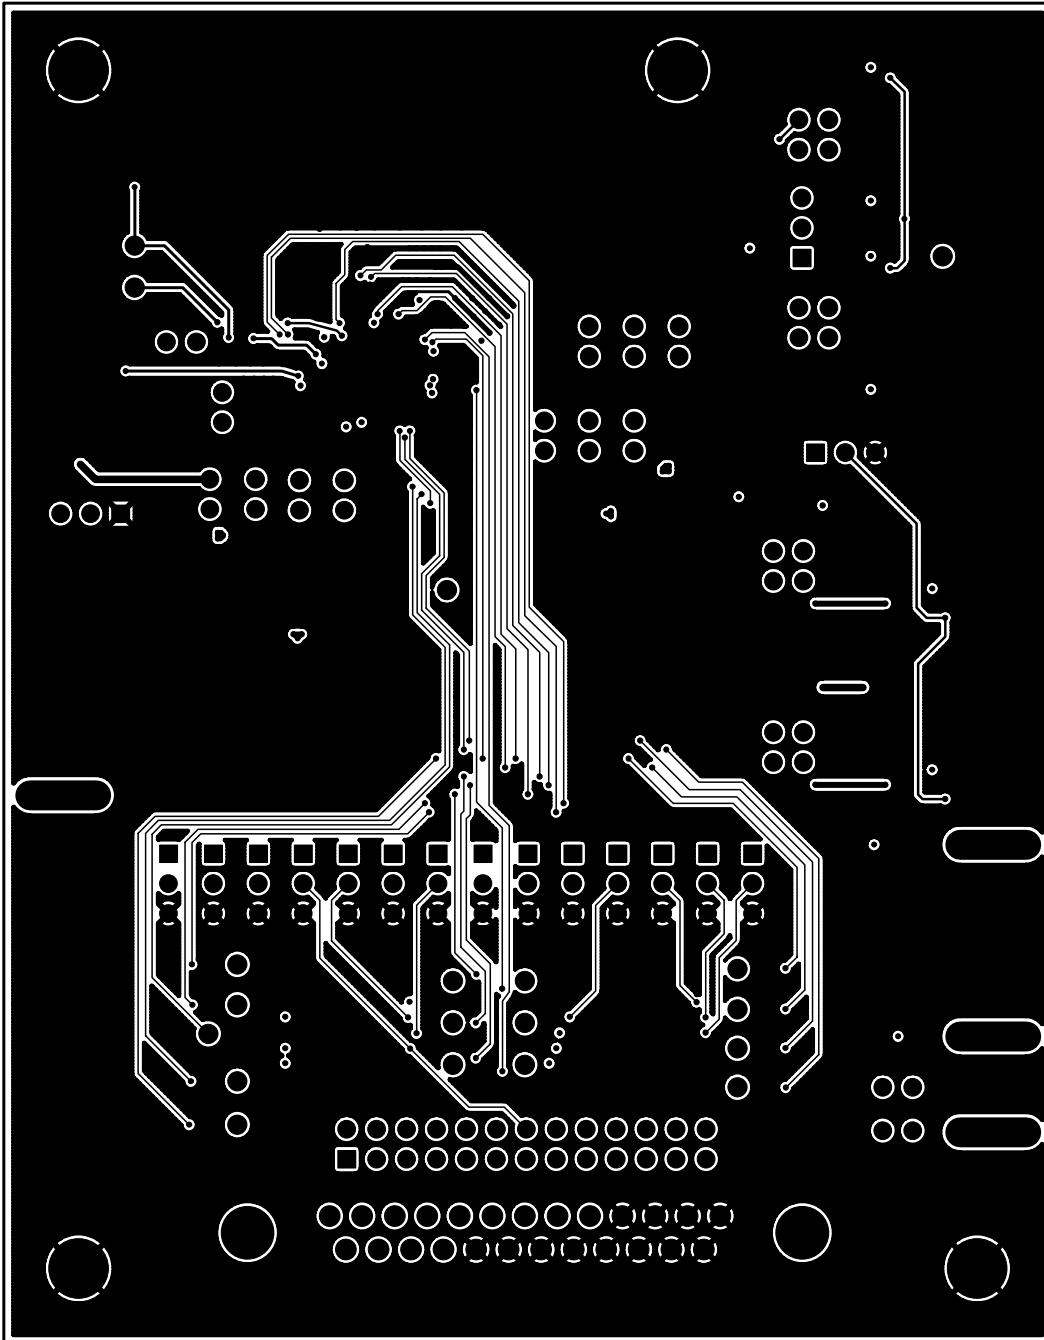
MAX2838 EV Kit PCB Layout—Inner Layer 3, Routes
